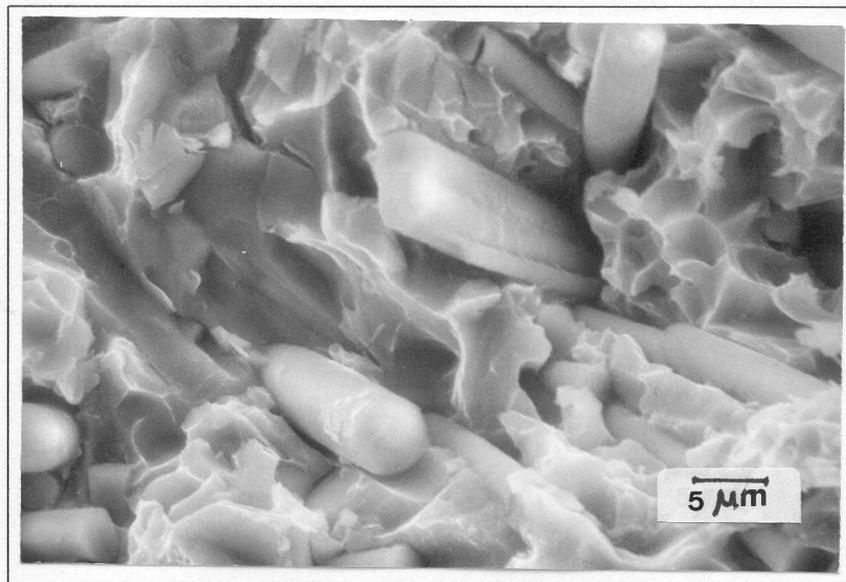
Fracture surface of specimen tested at 250°C
